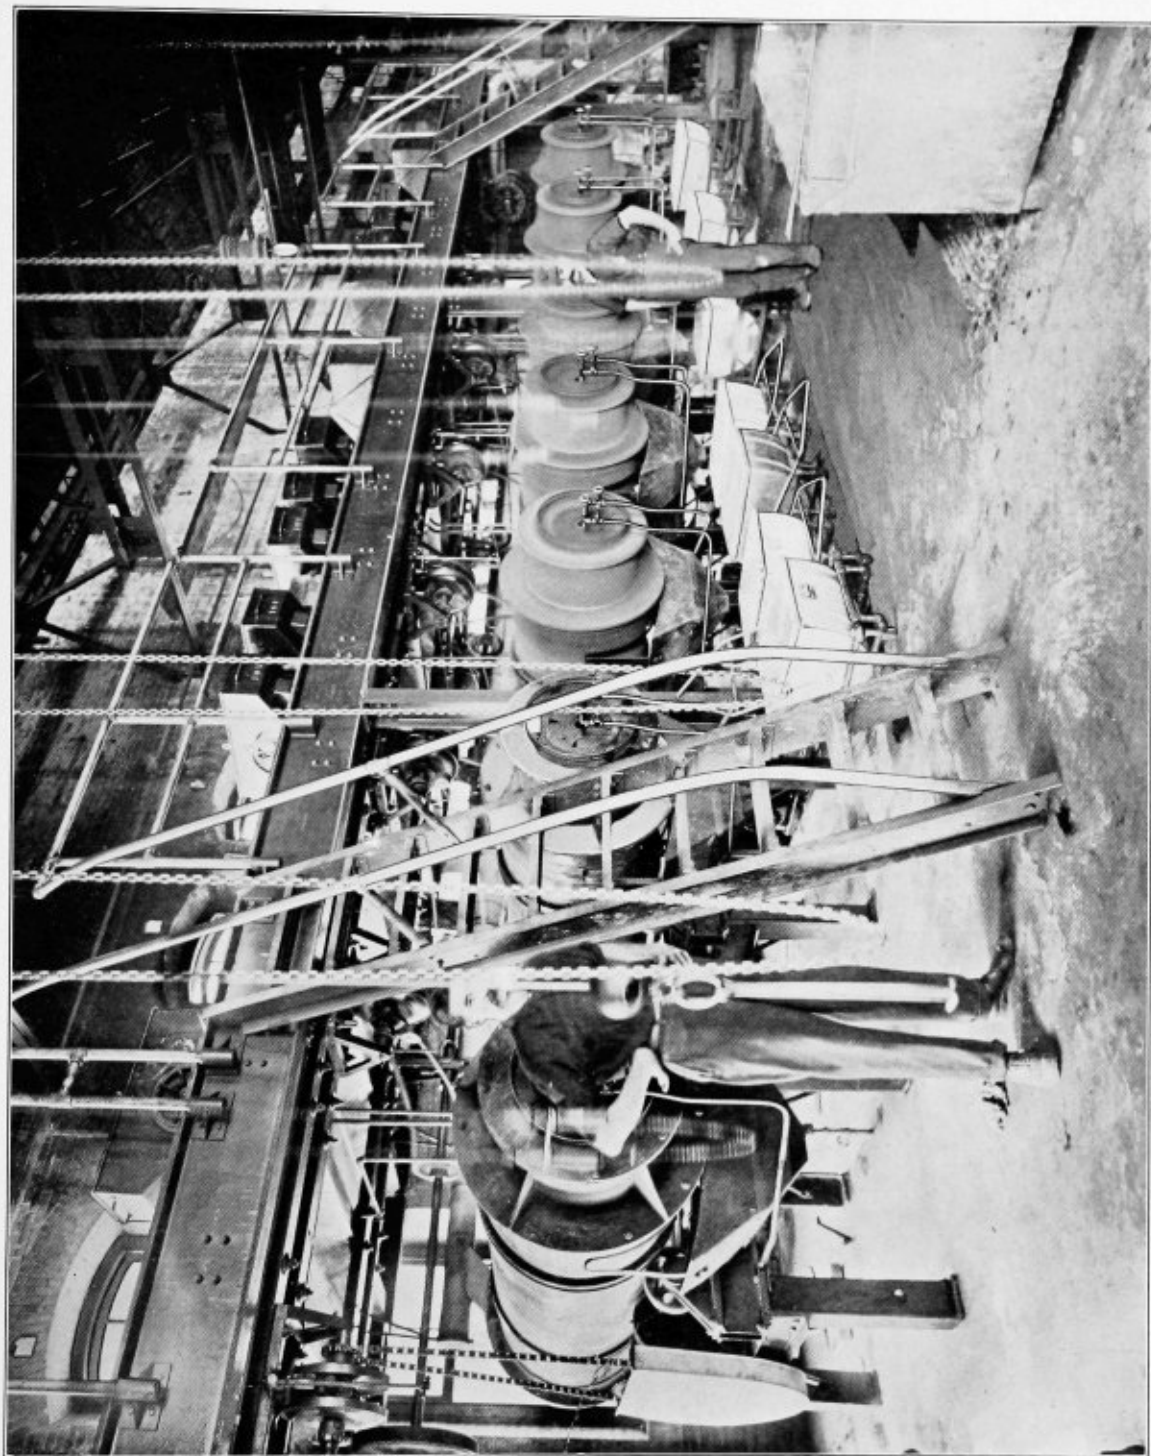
BATTERY OF 7 ROCKWELL ROTARY ANNEALING FURNACES — OIL FUEL.
